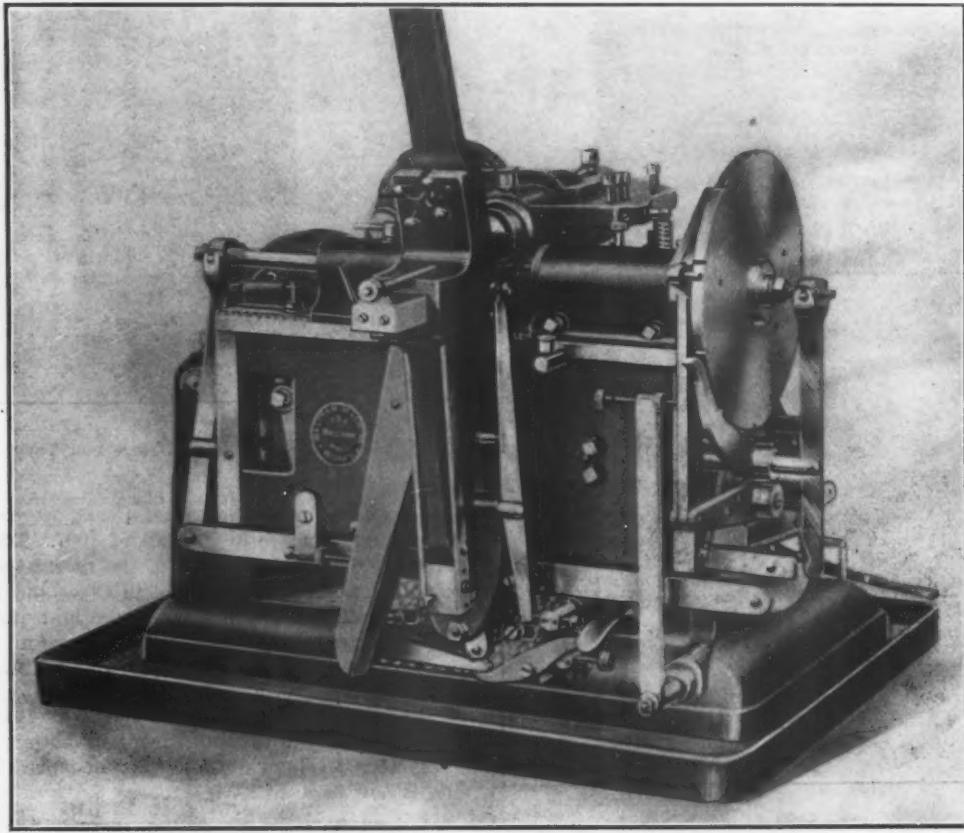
An Automatic Machine for Cutting Clock Gears, Made by the Waltham Machine Works, Waltham, Mass.
